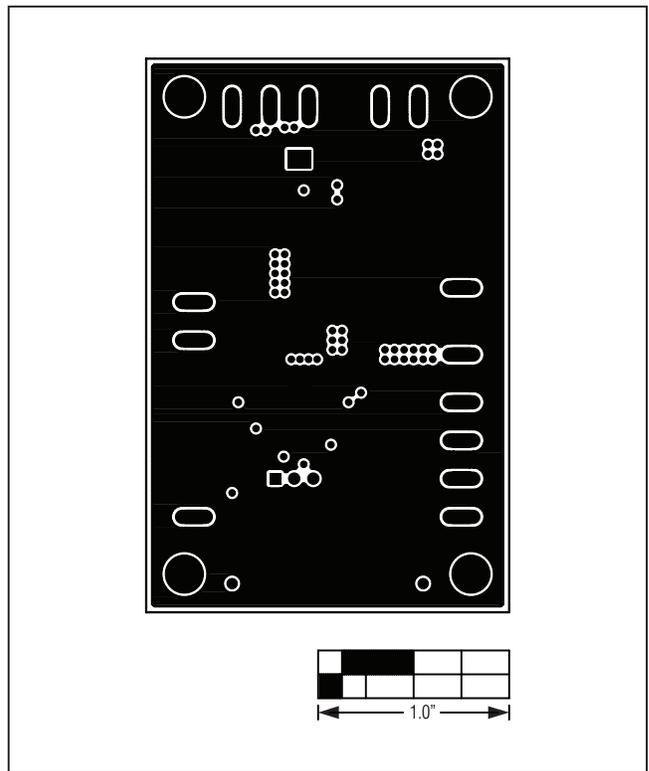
MAX17512 EV Kit PCB Layout—Layer 3
